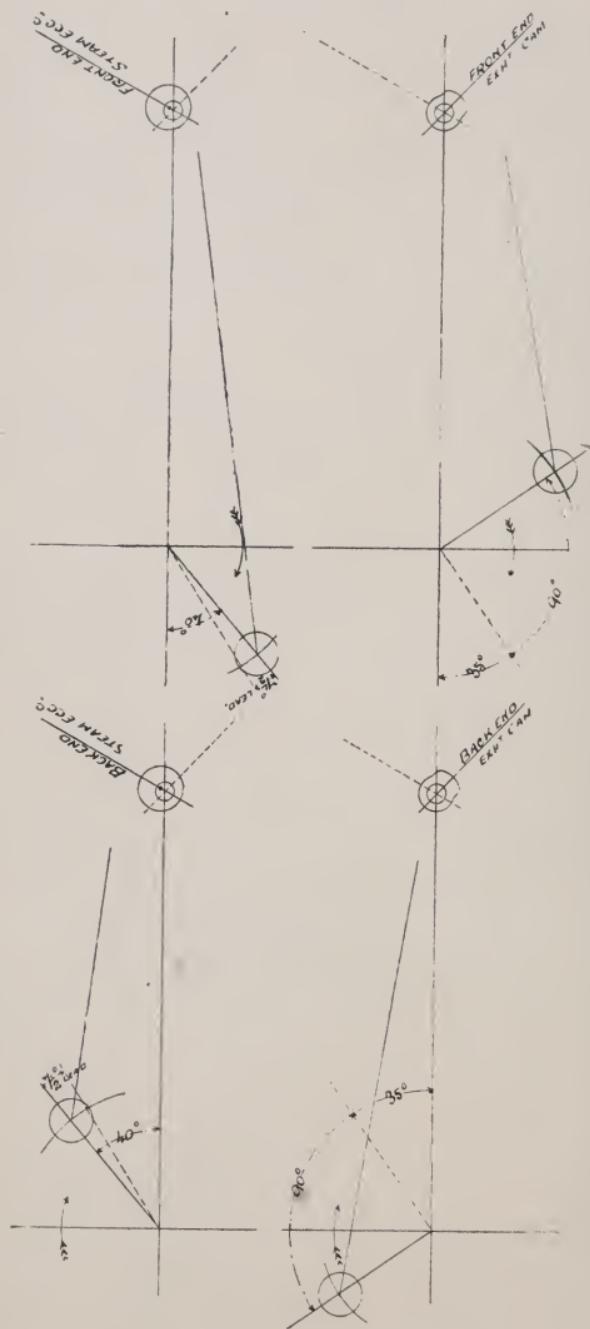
A.—Angles of Crank for Setting Eccentrics and Cams—Clench and Co.'s Trip Gear.
